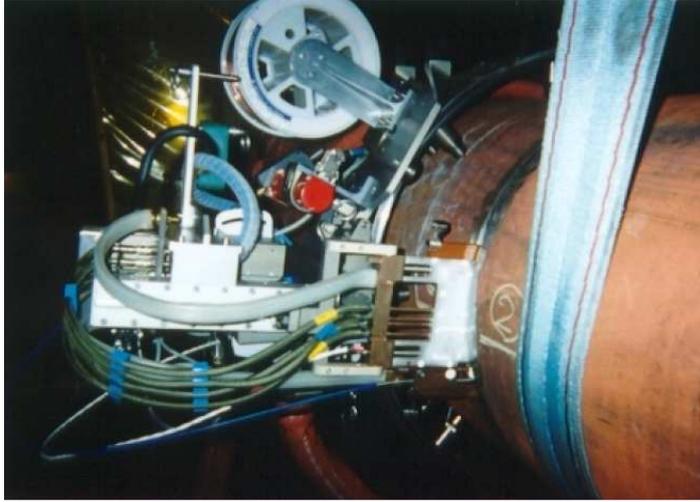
Narrow gap welding of thick wall pipe with special narrow gap welding torch (Meuronen/Polysoude)
